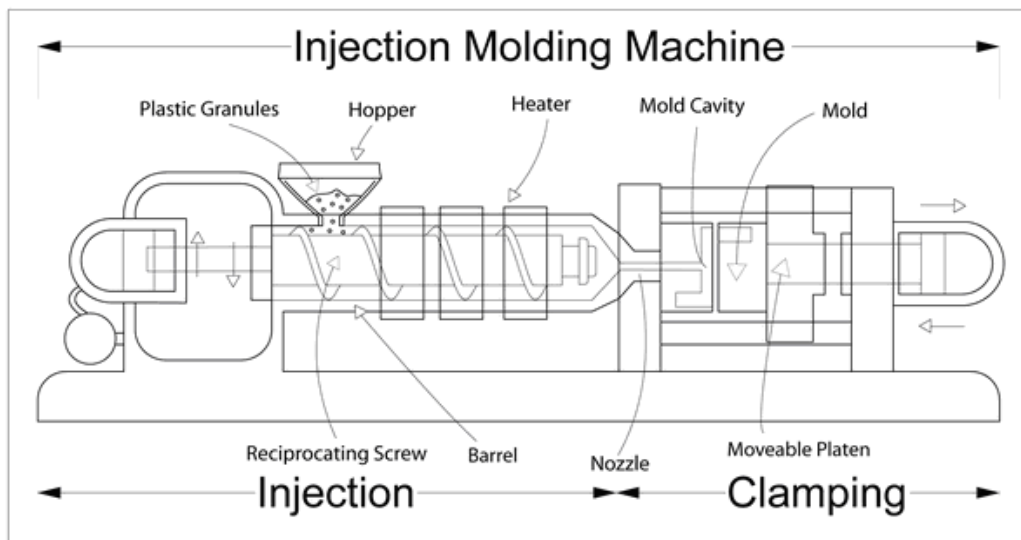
Diagram of injection molding machine (Rockey, 2009)
